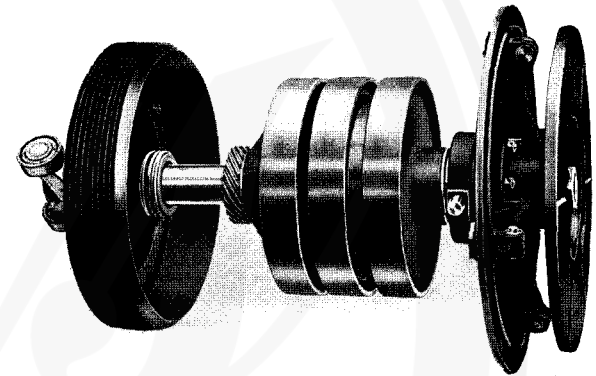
Assembled Gears and Direct Drive Clutch Plate.
